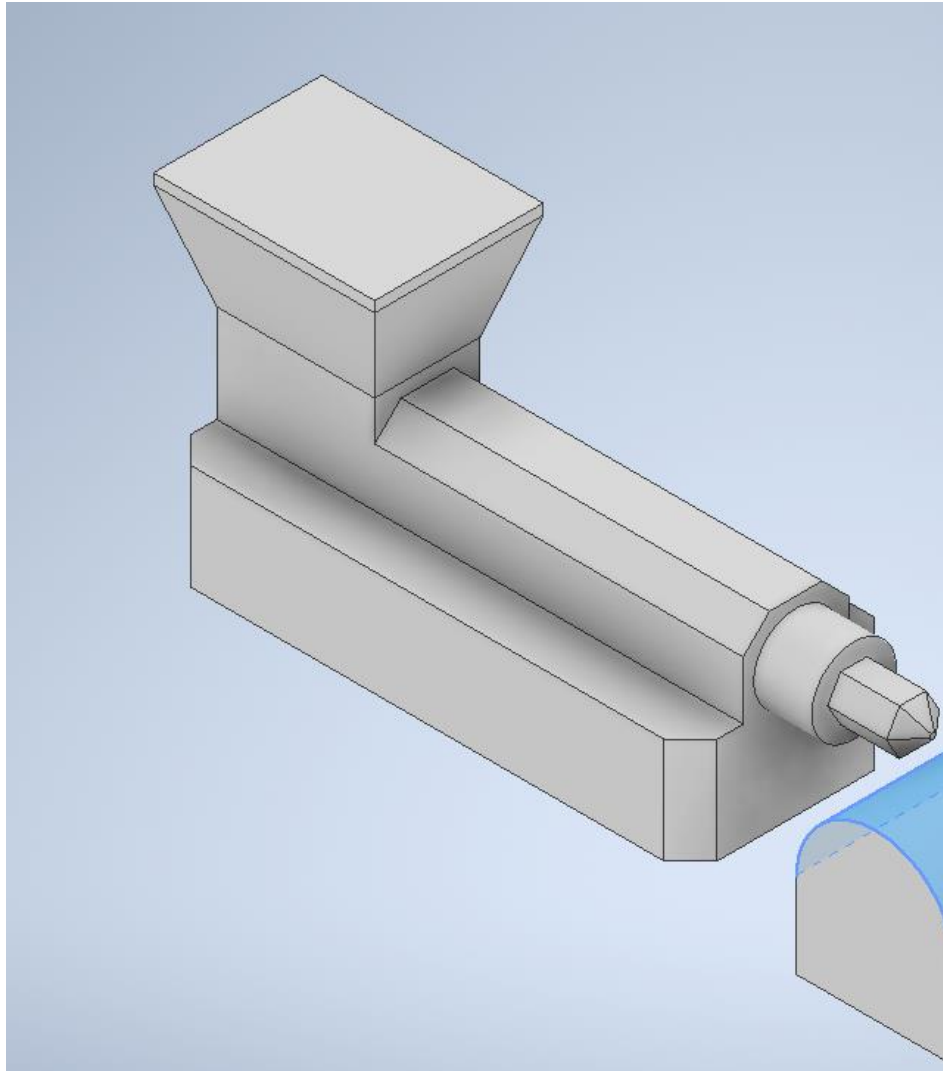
Mechanical Sketch - Extruder rendering. Isometric view.
